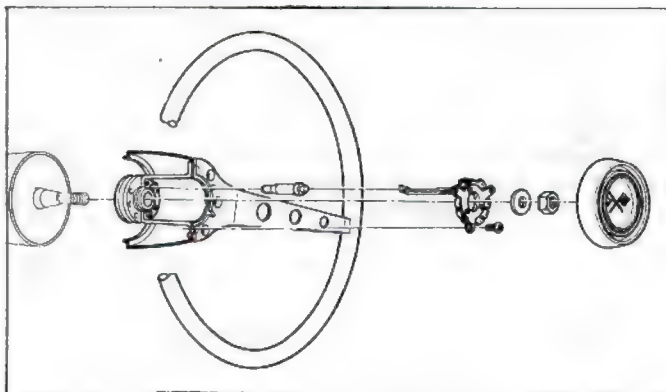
Simulated Wood Steering Wheel and Attaching Parts
